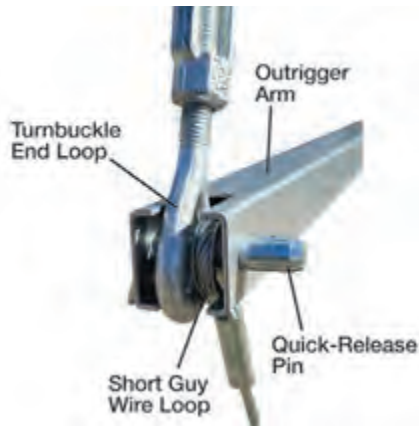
Attaching Turnbuckle and Short Guy Wire to Outrigger Arm
